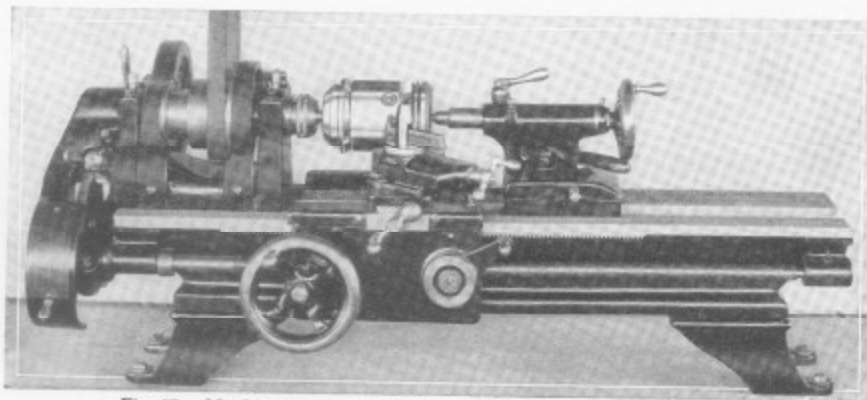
Machining a Piston to Finished Diameter in a 9-inch Lathe
